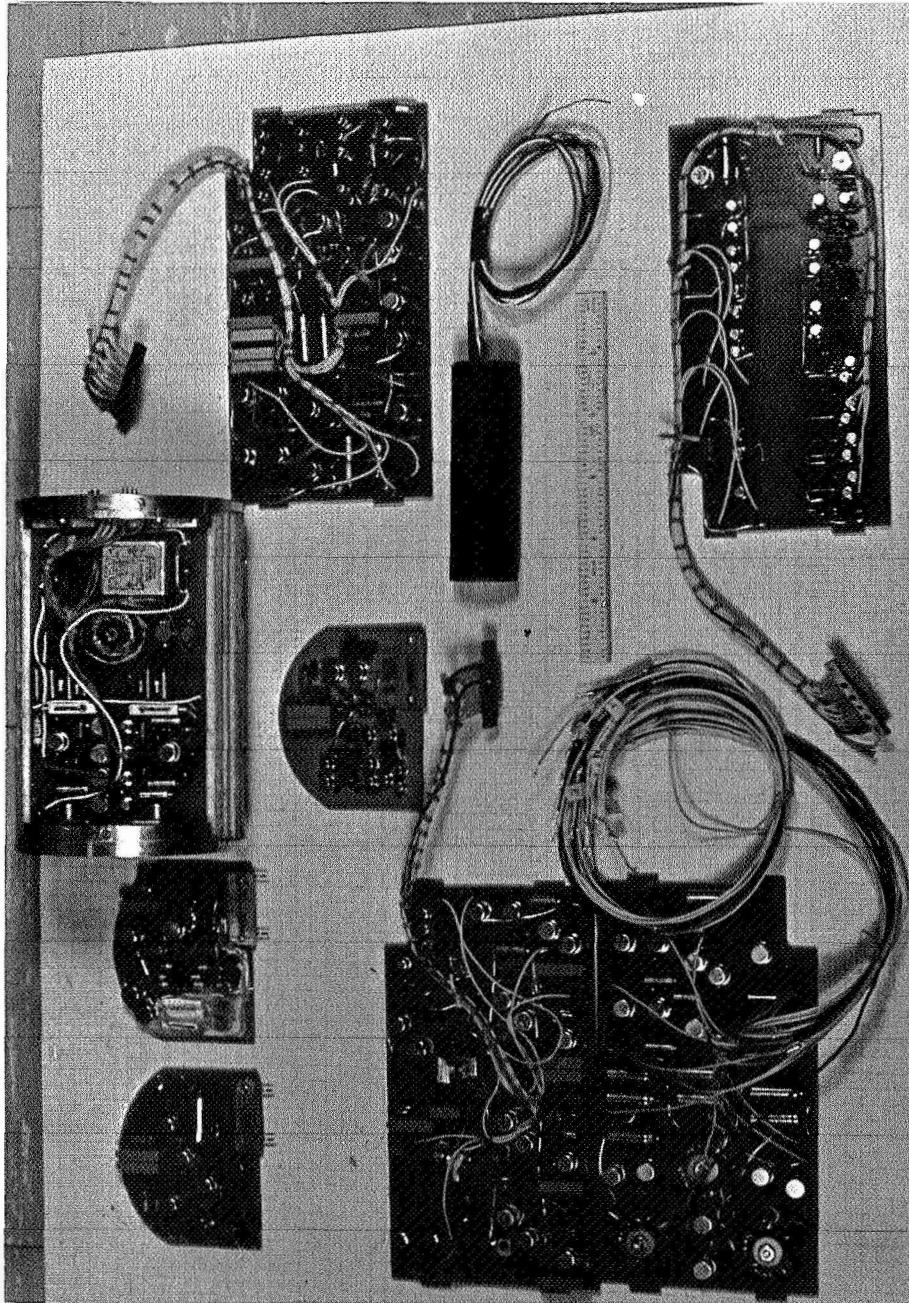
PRINTED CIRCUIT BOARDS WITH POWER SUPPLY AND TELEMETRY
